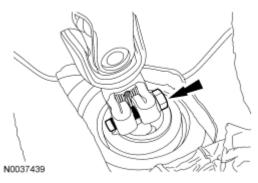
Locating Steering Intermediate Shaft Bolt Courtesy of FORD MOTOR CO.
